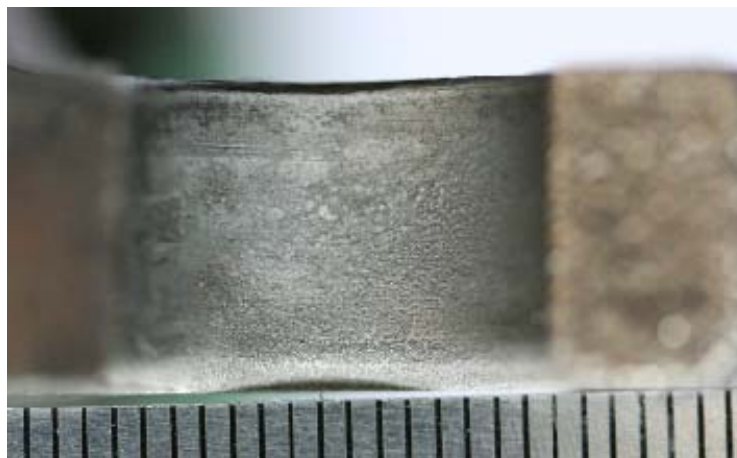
Fretting/corrosion pits on the surface of the flange hole
